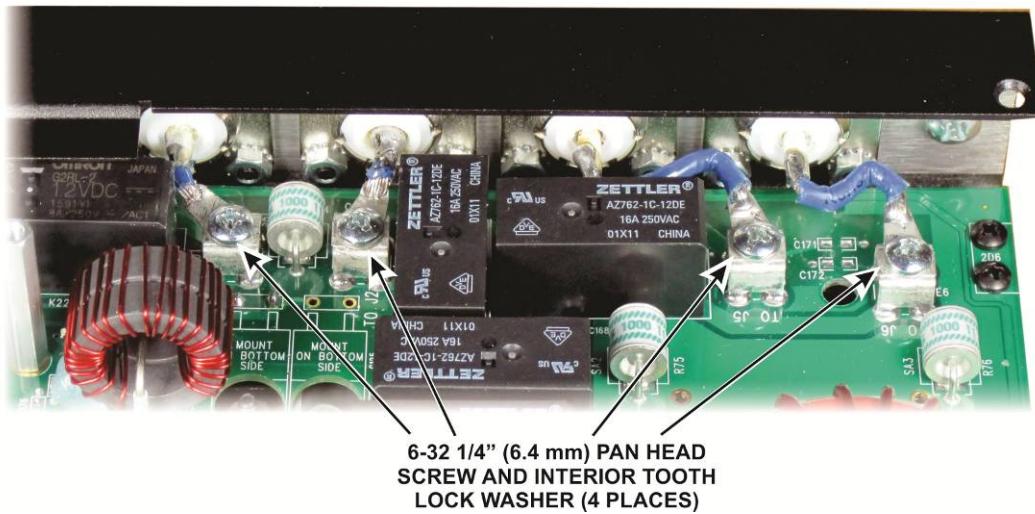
Securing SO-239 Wires to the PC Board Screw Posts.
